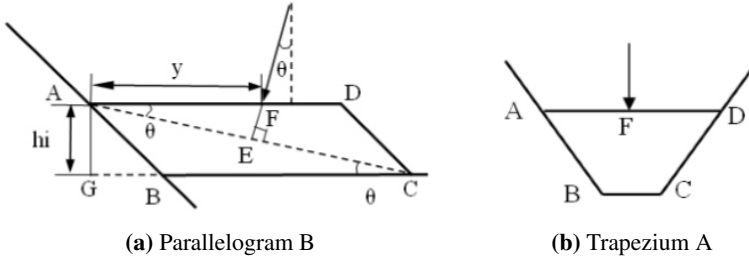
Weld bead geometry, Zhang et al. (2011)
